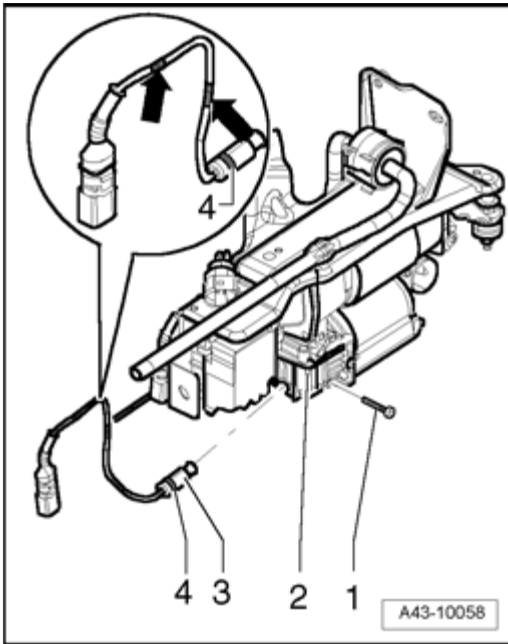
Identifying Bolt, O-Rings, Housing, And Level Control Pump Temperature Sensor
